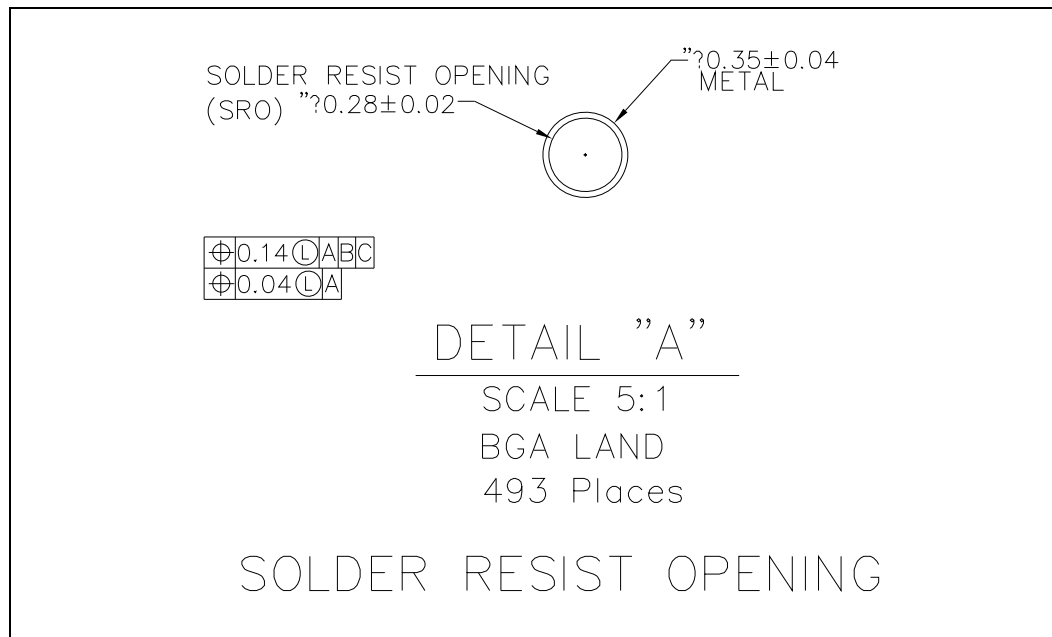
Intel® Platform Controller Hub MP30 Package (Solder Resist Opening)
